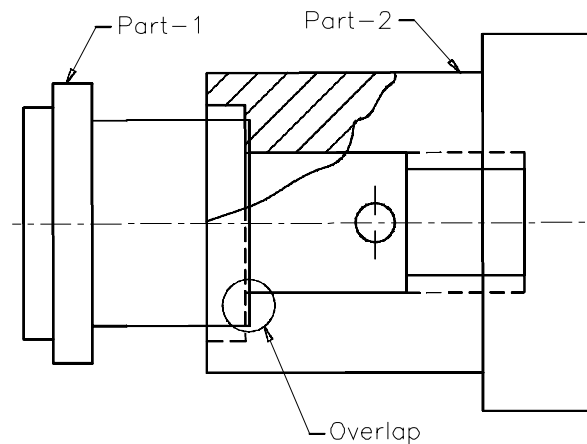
Assembly drawing after attaching Part-1 and Part-2
